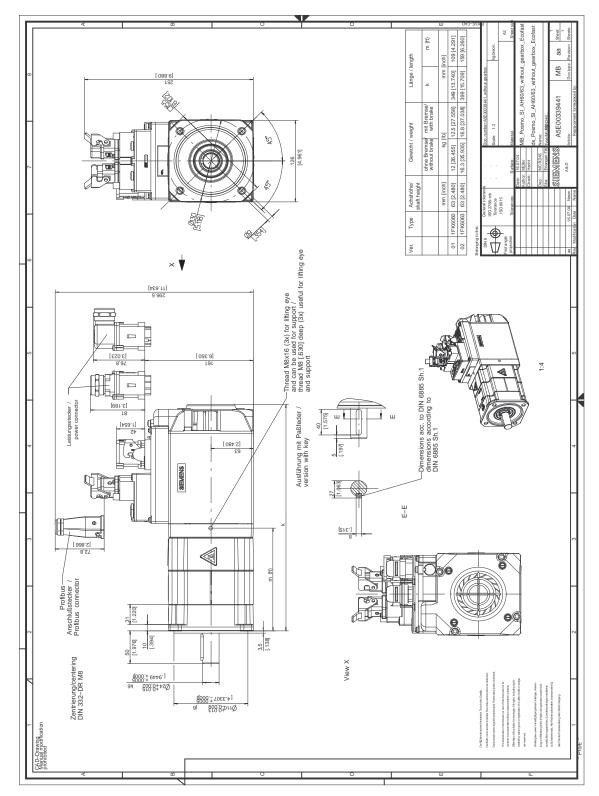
Dimension drawing POSMO SI 6SN2500-2CF00-0G U with gearbox LP155-M01
